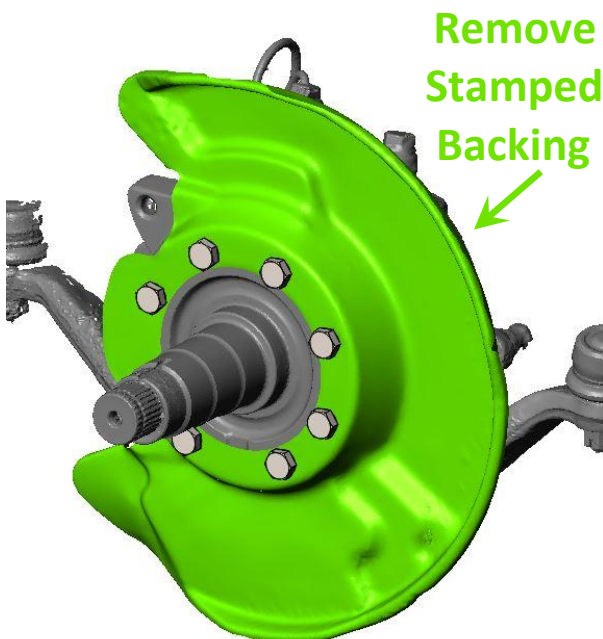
OEM Stamped Steel Backing Plate Identification (RH Shown)
